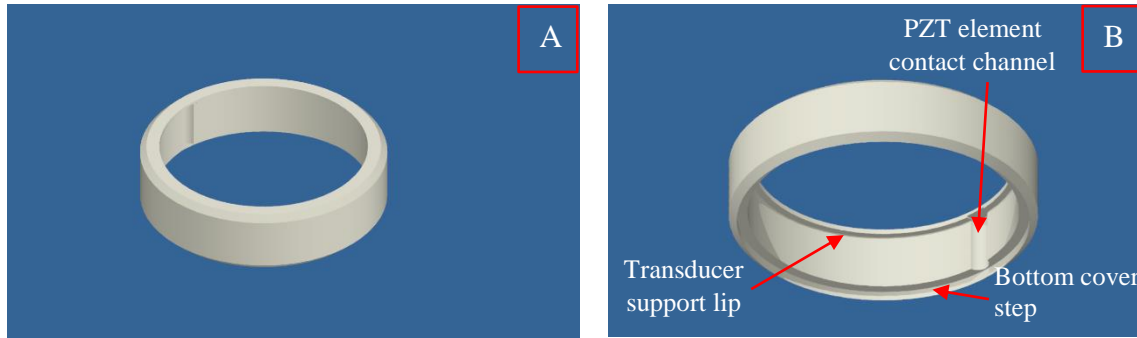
Ring-shaped structure of transducer housing, A) top view, B) bottom view.
